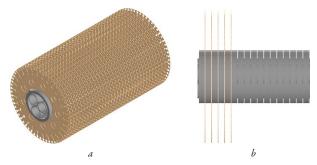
Device for simultaneous processing of parts with their rigid fixation: a – isometric view; b – front view
